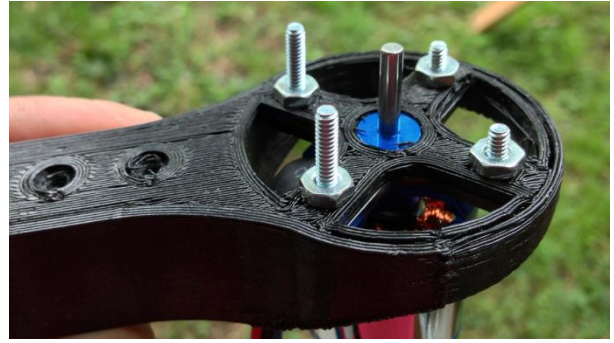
Example 3D printed motor mount with stripped threads (<https://backyardrc.wordpress.com/category/quadcopter/>)
